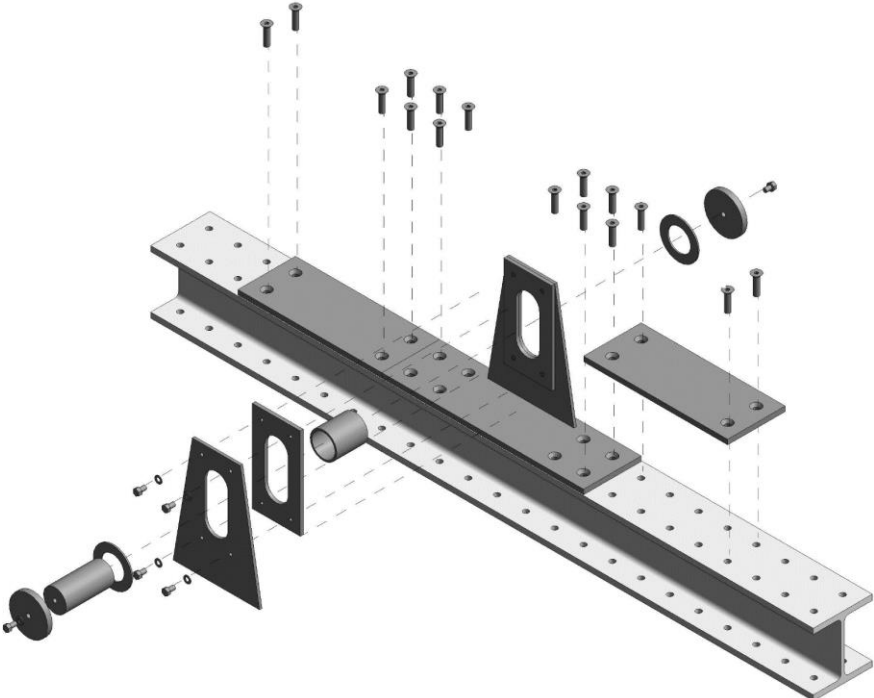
Exploded view of vertically slotted face plates for *Slip-Friction Rocking*.
